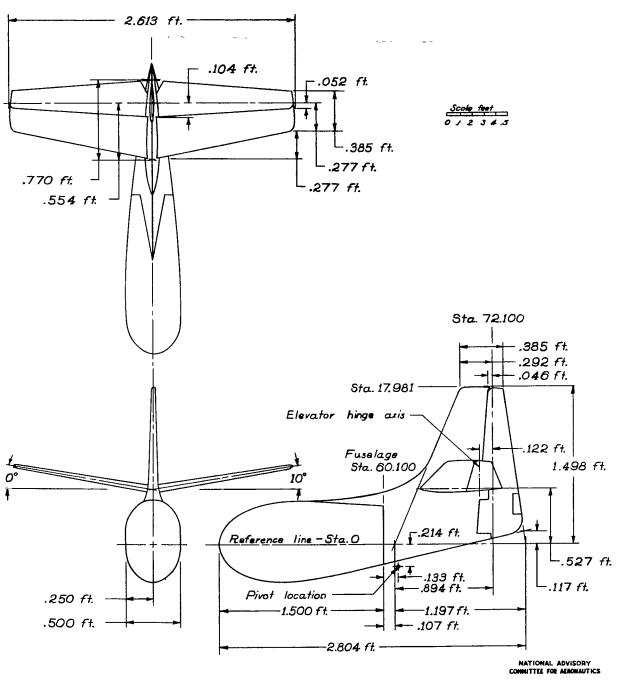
Details and dimensions of 0.14-scale model of the XP-83 airplane tail unit tested in the Langley 4-by 6-foot wind tunnel.
